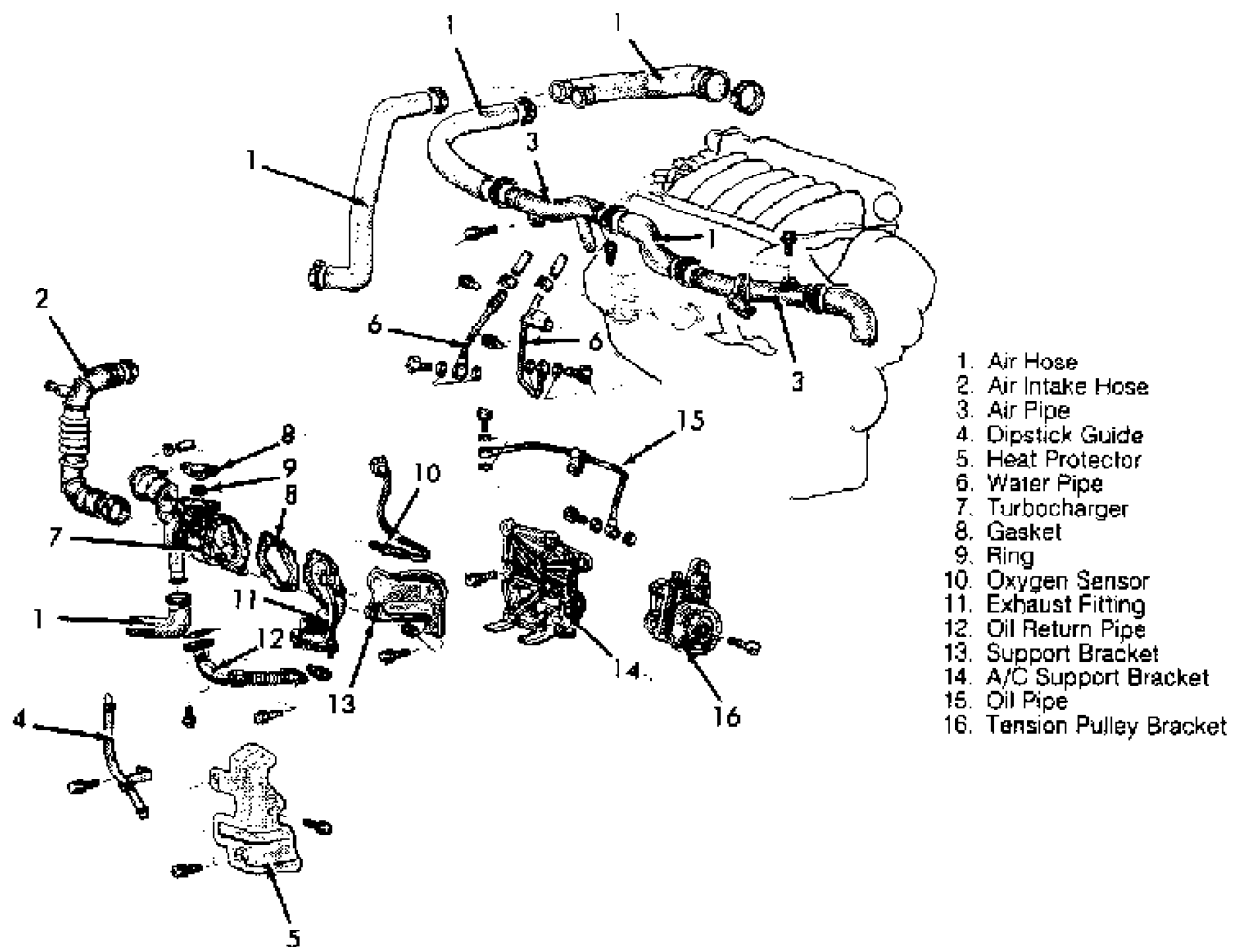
Removing Front Turbocharger (Stealth & 3000GT)
